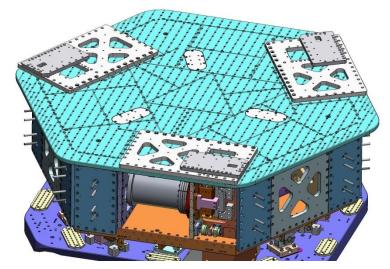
Lay GS-13 Outer Walls and Wall Covers on top of Optical Table, preferably above their final locations on Stage 1.
